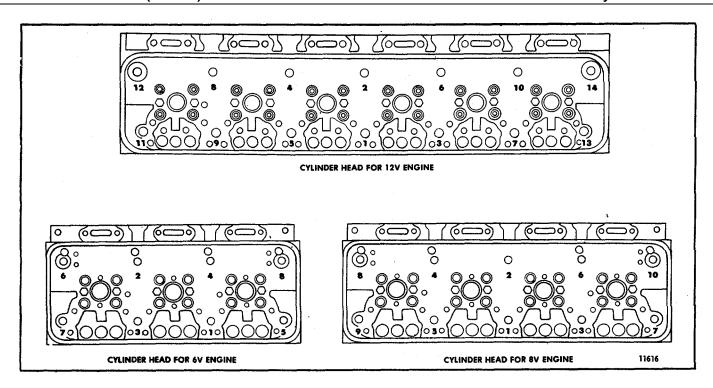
Cylinder Head Bolt Tightening Sequence
